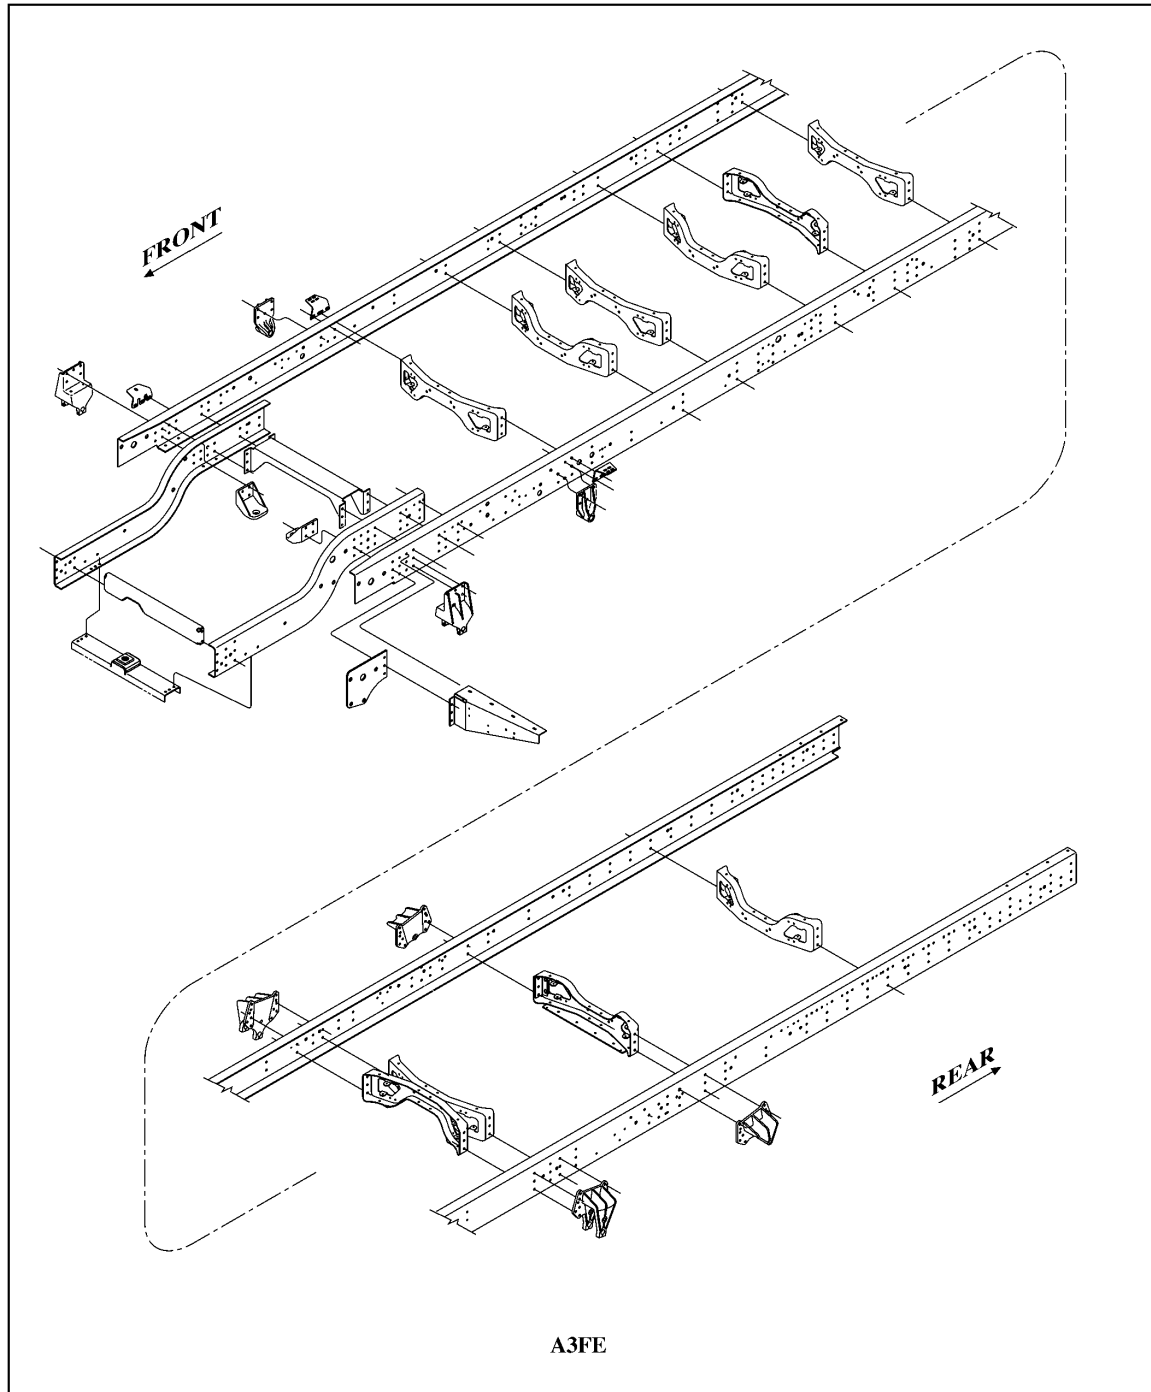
Frame Configuration with Spring Suspension Forward Engine
